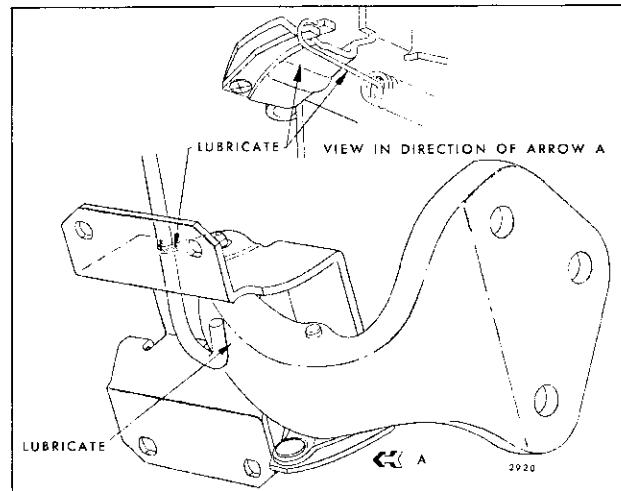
Front Door Hinge Assembly - "E" Body Styles
